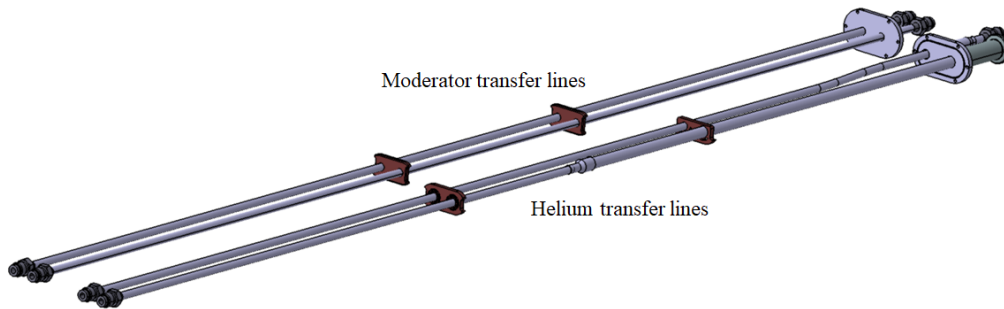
CAD view of the two transfer line sections, one for the moderator and one for the refrigerant (helium).
